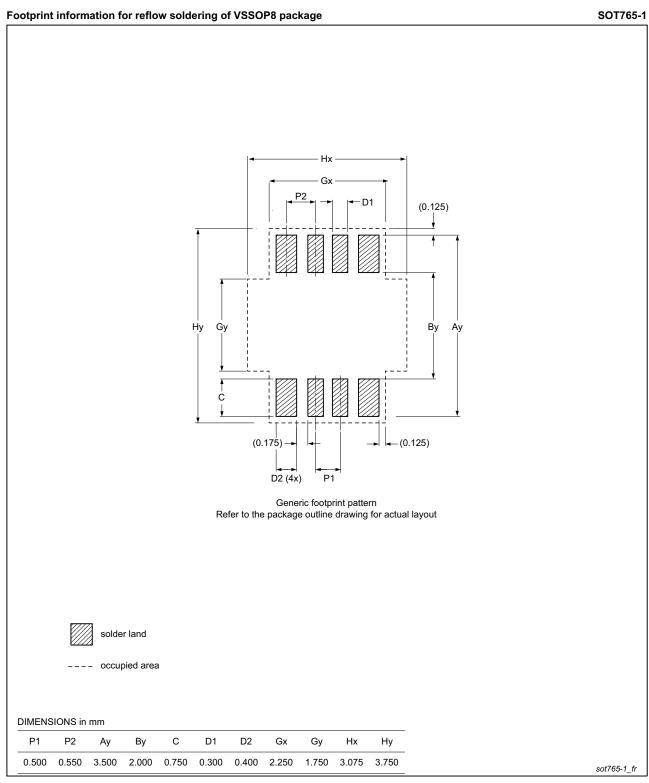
PCB footprint for SOT765-1 (VSSOP8); reflow soldering
